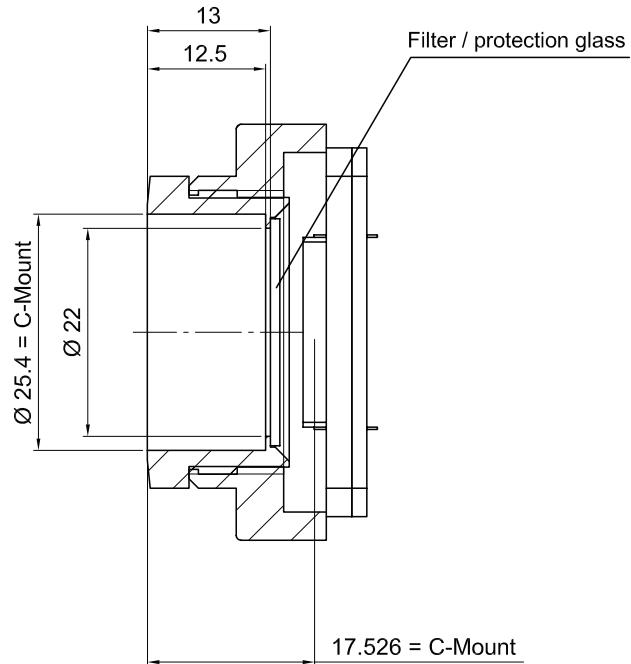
Pike C-Mount dimensions (large filter for Pike F-100, F-145, F-210, F-421)
